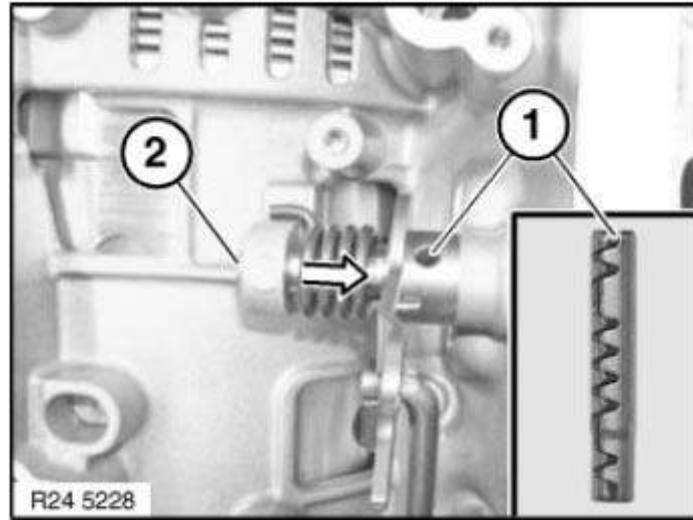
Driving Clamping Sleeve Out Of Selector Shaft
